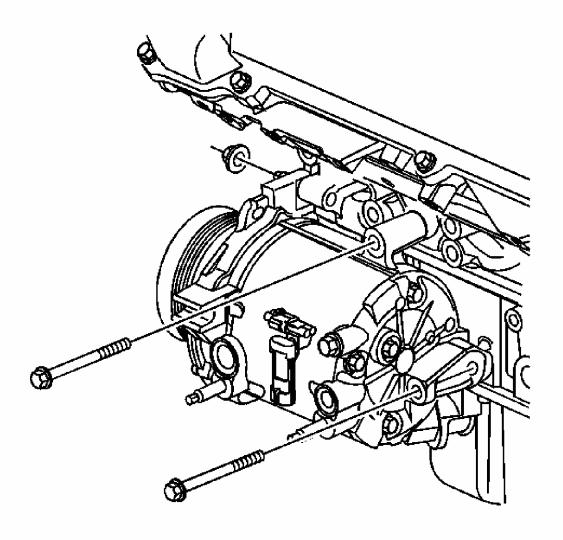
View of Air Conditioning Compressor Bolt Courtesy of GENERAL MOTORS CORP.
